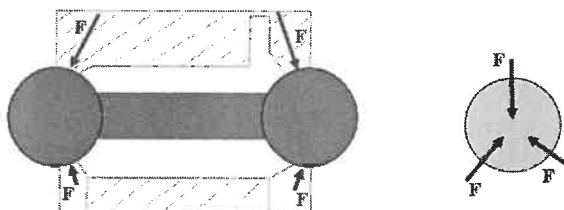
Model of the spindle design, where F indicates contact points between pads and the spindle housing, a) side view of the spindle diagram b) is a front view of symmetrically placed contacts.
